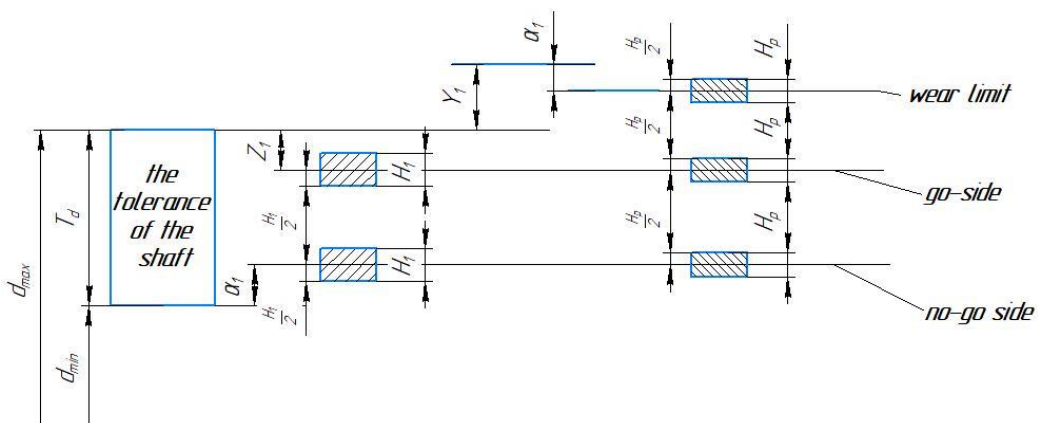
Is the layout of gauge tolerance limits for the shafts and control gauges inspection
